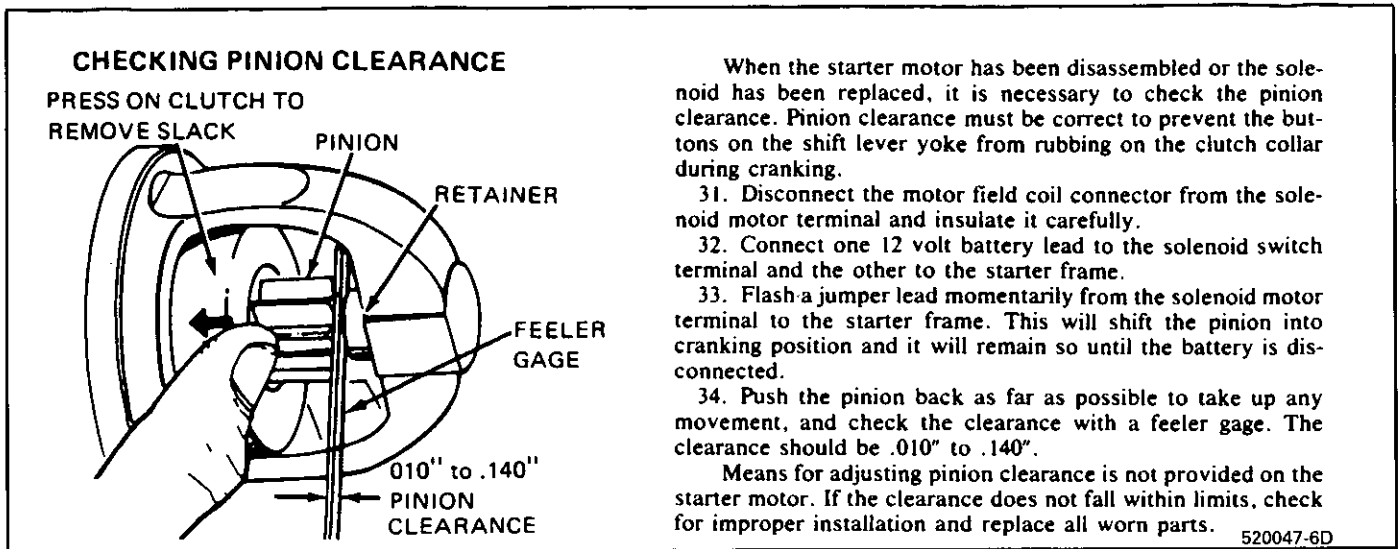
Starter Motor Disassembly, Test, and Reassembly 6 of 6
